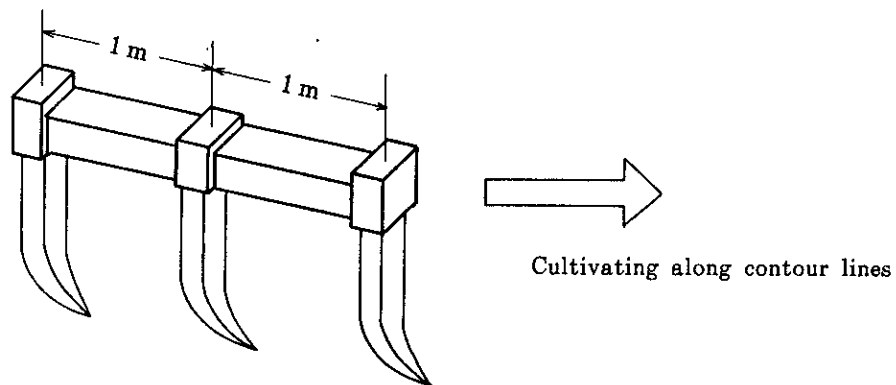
Ripper ; One of the Attachment for Cultivating Machine
